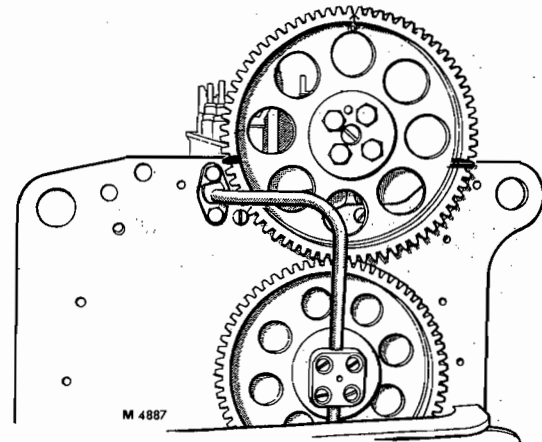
CAMSHAFT GEAR TIMING MARKS
